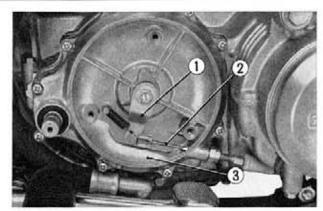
① Clutch lever ② Clutch cable ③ Clutch case
